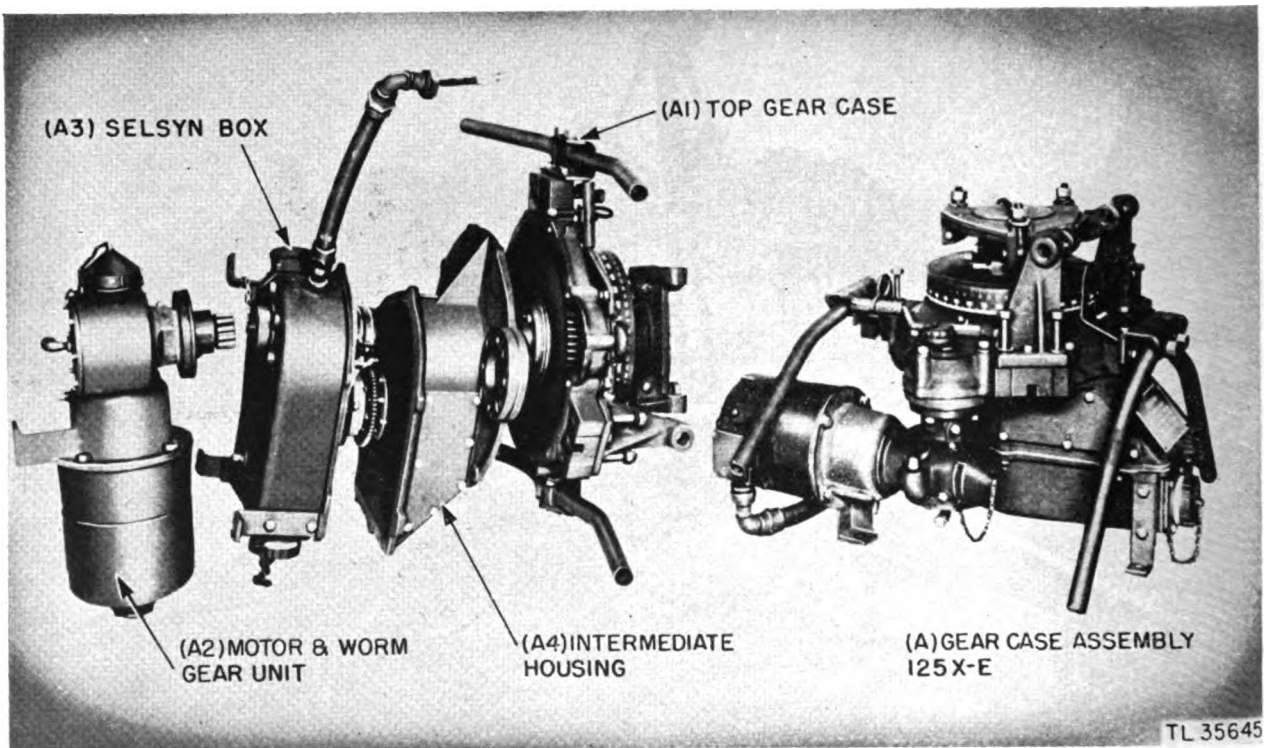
Tower TR-24-A, gearcase assembly 125X-E.
